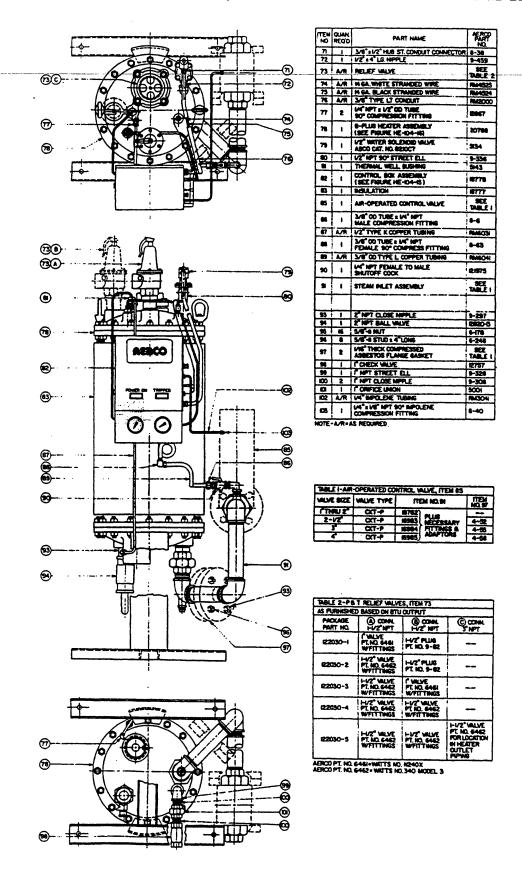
AERCO Model SW1B-PLUS Packaged Water Heater with Air-Operated Steam Control Valve Assembly and Parts List
